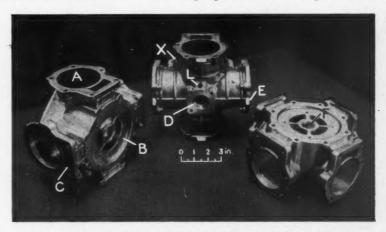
A die casting for a meter body, as received by Vickers Armstrongs (Engineers), Ltd., is seen at the left; a casting after fine-boring, at the right; and a casting with the cylinder liners inserted and machining completed, at the centre
